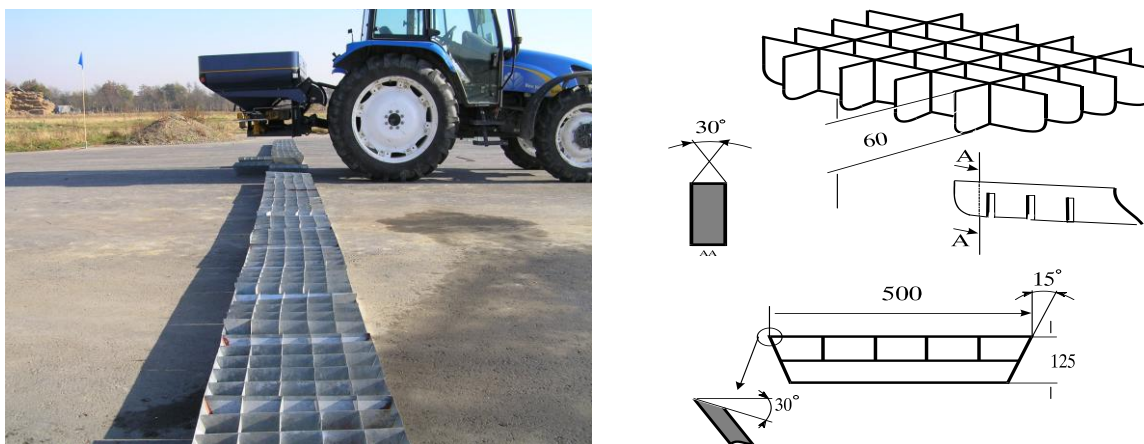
Position of the testing boxes in the course of the spreader checking with technical standards of fabrication in mm
